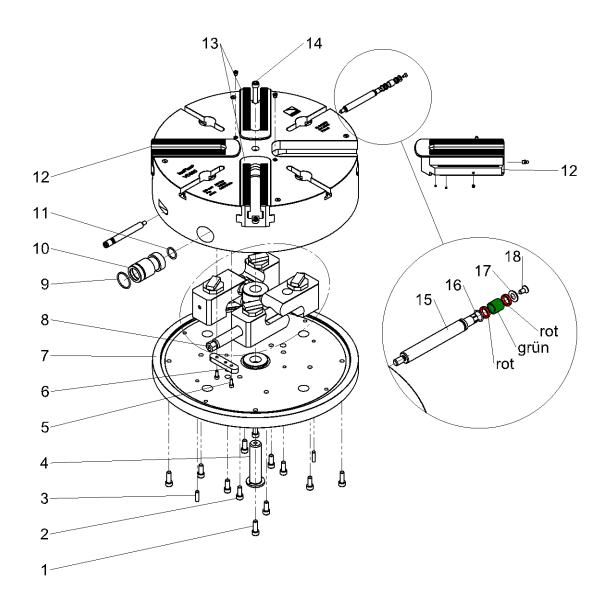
Disassembly / re-assembly of the chuck (VD050)
